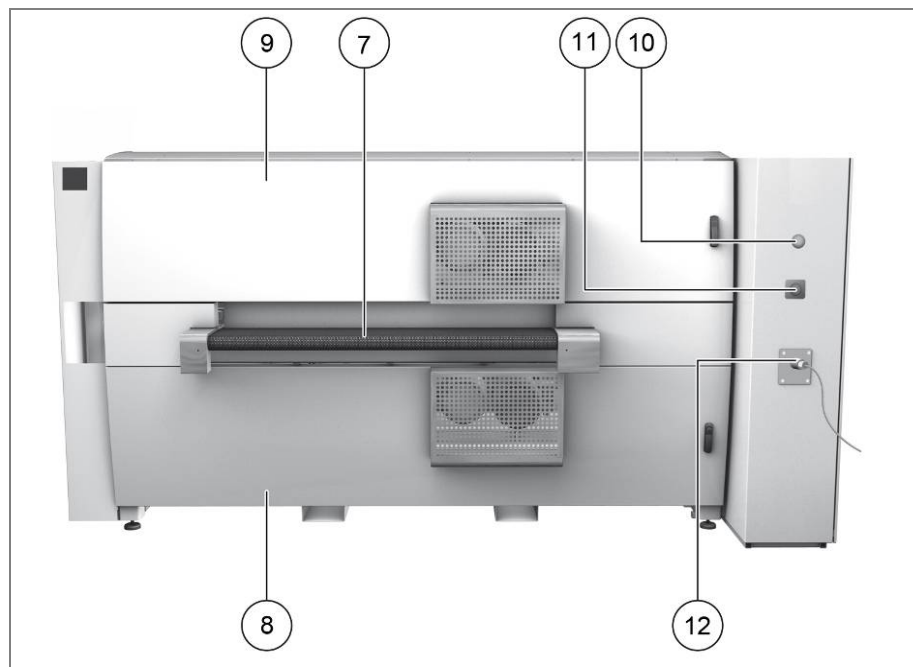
Components of the machine SBM-M D2 1000 E/M, output side (back of)
